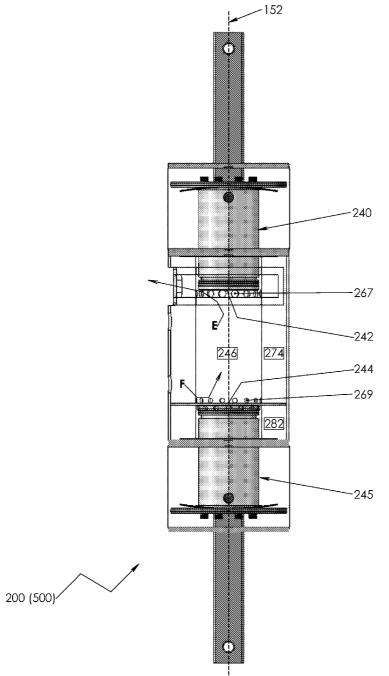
D. SIDE, CROSS-SECTIONAL VIEW OF COMBUSTION ASSEMBLY DURING ENGINE CYCLE
